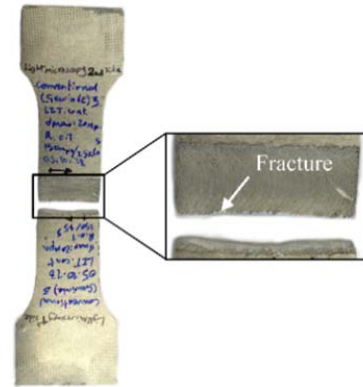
Example of a fractured specimen at the end of the fatigue tests
